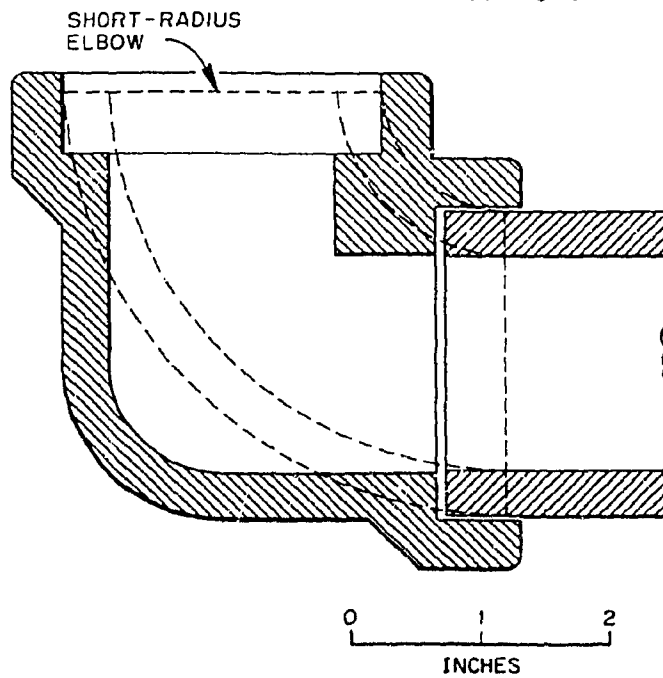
ANSI B16.11 90° elbow, 2-in., 6000-lb-class, sched-160 pipe.
